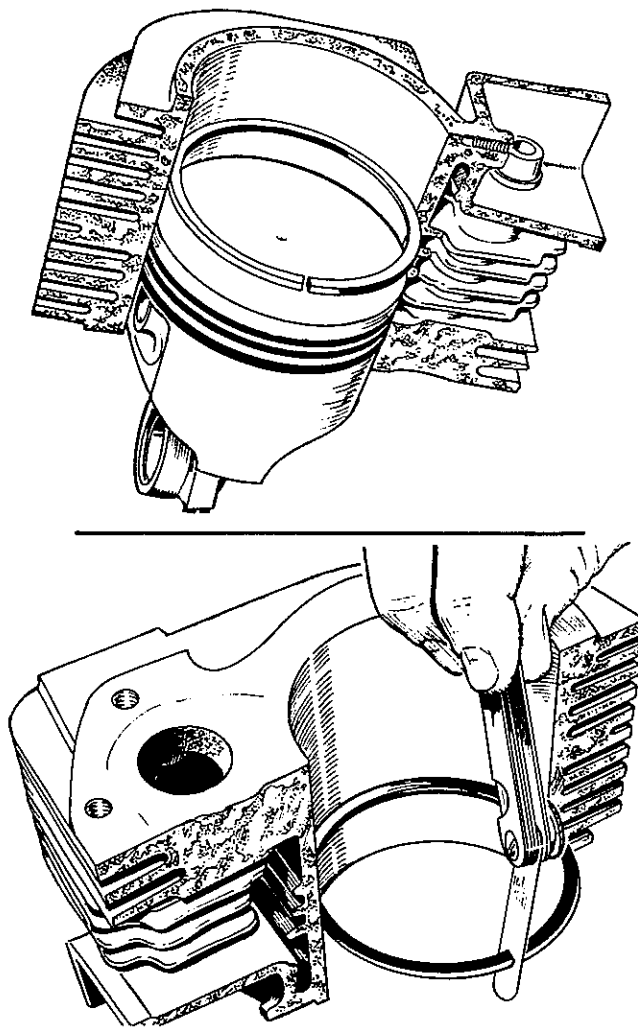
POSITIONING OF PISTON RING AND MEASURING OF END GAP
